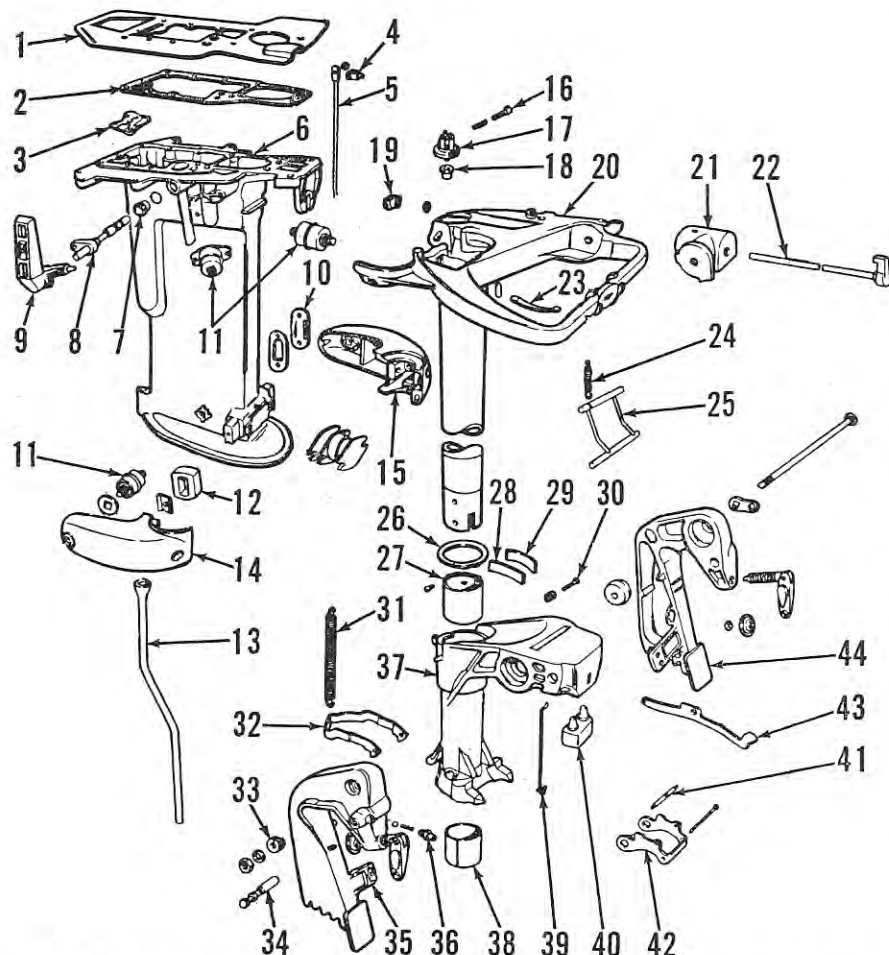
Exploded view of stern bracket, exhaust housing, drive shaft housing and associated parts used on late 25 horsepower models. Other 22 and 25 hp models are similar.
